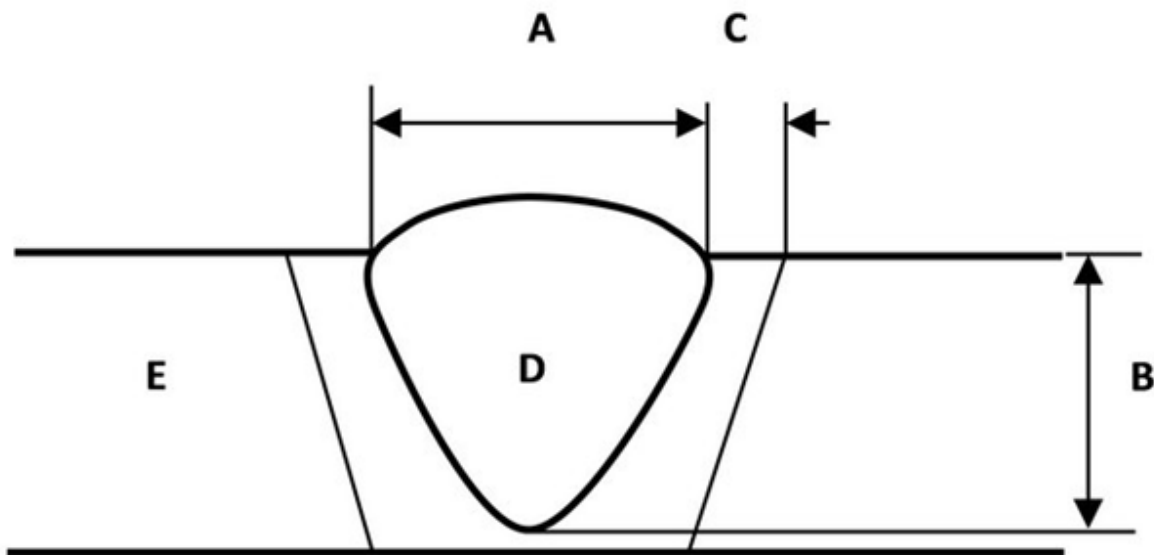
Schematic of a simple weld bead shape. A: Bead width; B: Depth of penetration; C: Heat affected zone width; D: Weld metal; E: Base metal [26].
